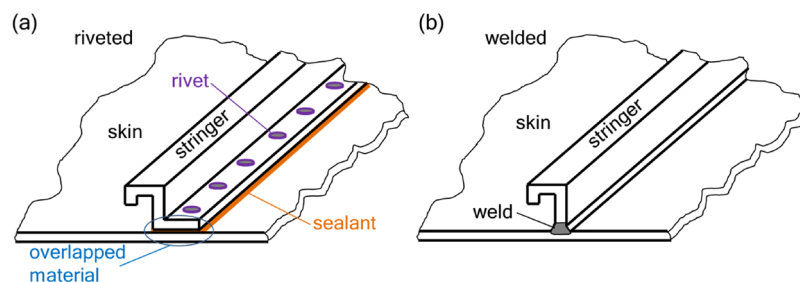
(a) Conventionally riveted and (b) welded T-joint representing the skin-stringer connection of an aircraft fuselage structure.
